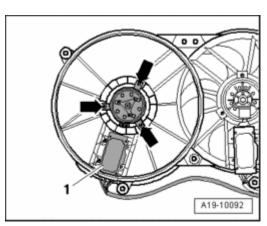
Removing Bolts And Fan Wheel Courtesy of VOLKSWAGEN UNITED STATES, INC.
